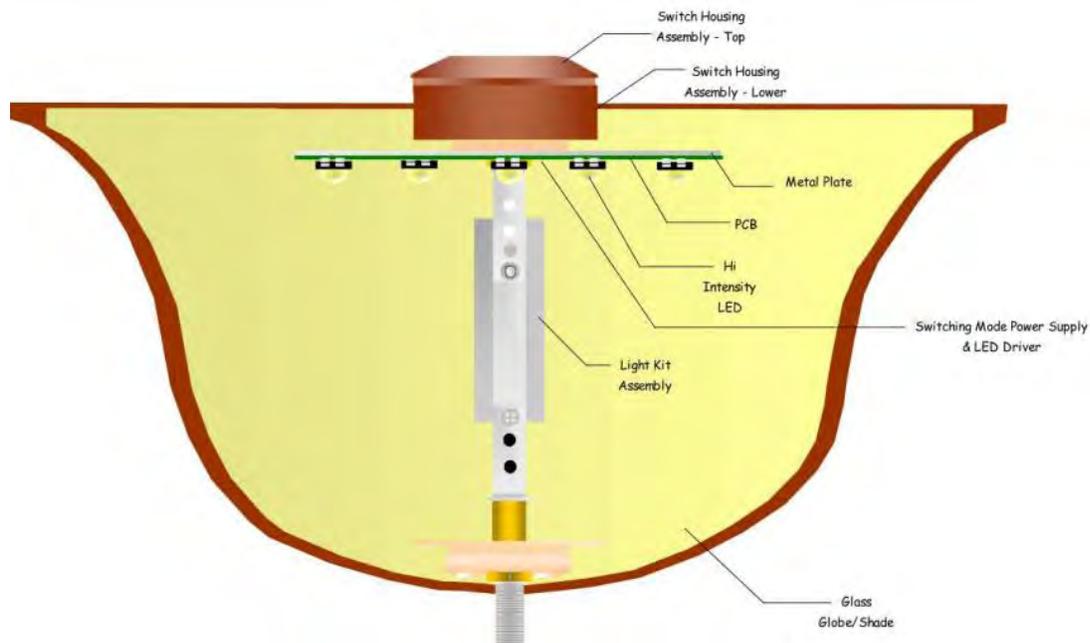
SMPS and driver electronics packaging, LED array metal plate, and switch housing assembly
